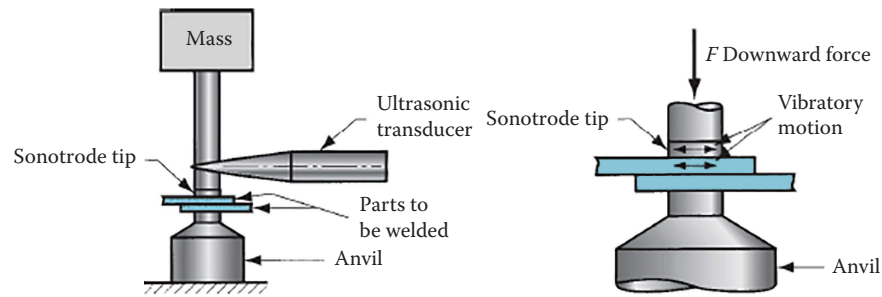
Ultrasonic welding; general setup for a lap joint and close-up of weld area^[12]
